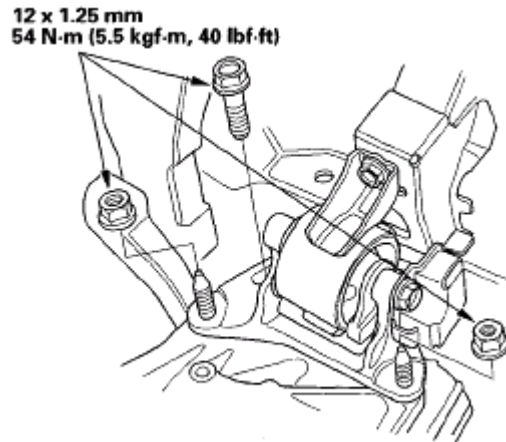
Identifying Transmission Mount Bracket Support Bolt And Nuts - M/T Model
